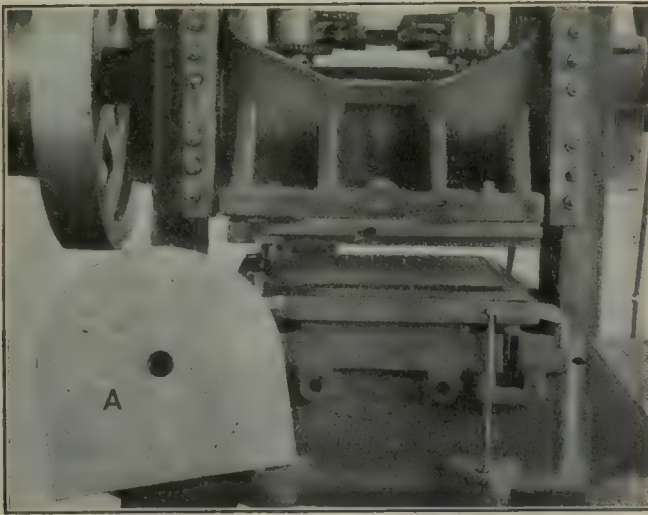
MACHINE FOR BLANKING AND FLANGING TUB ENDS
